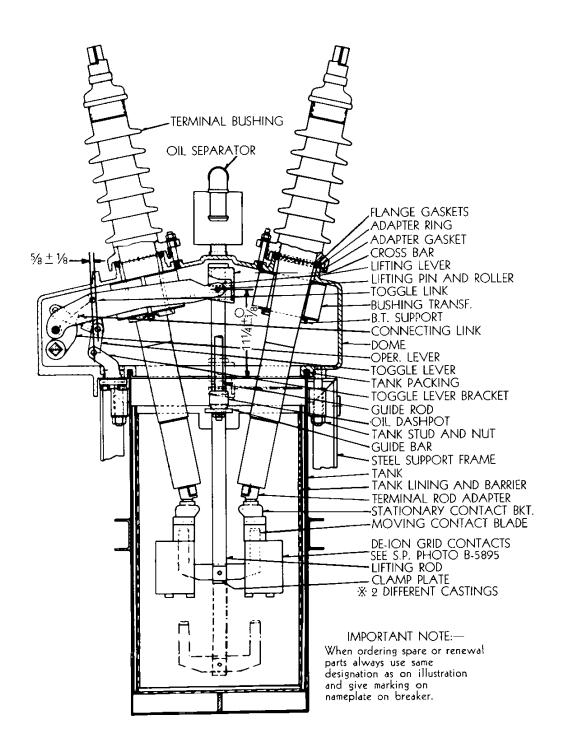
Amp., 34,500 Volt, Type BJO-B Breakers-Sectional View
